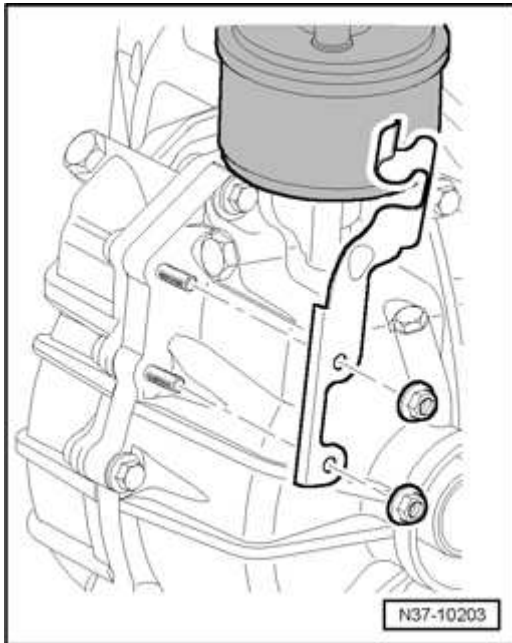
Identifying Selector Lever Cable Retainer And Bolts
